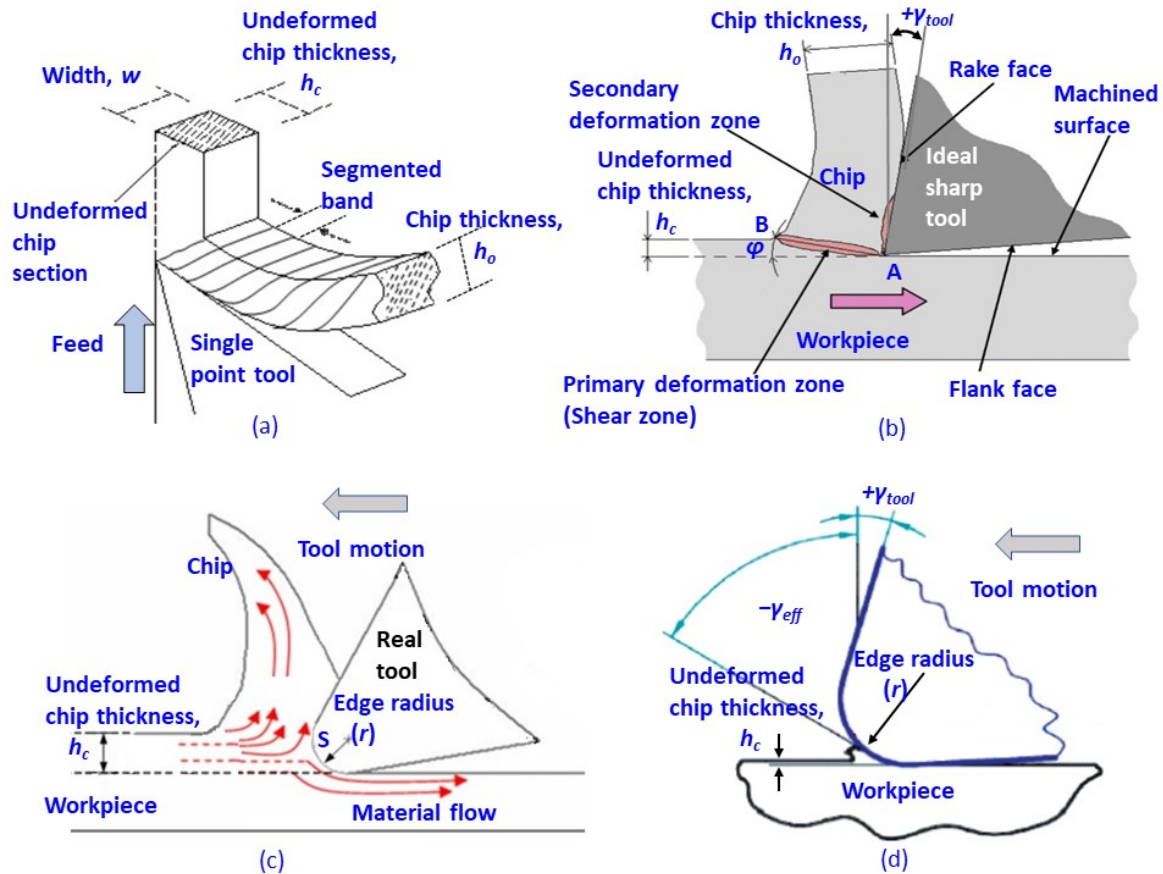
Schematic of (a) 3D view of orthogonal cutting with single-point cutting tool [28] (b) 2D view of macro machining model [29] (c) 2D view of micromachining model [30] (d) 2D view of ploughing in micromachining [33]. Copyright Permission obtained.
